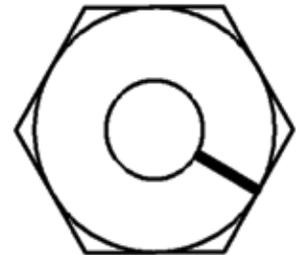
The bolt prefabricated symbol position B in bolt status imaging.
